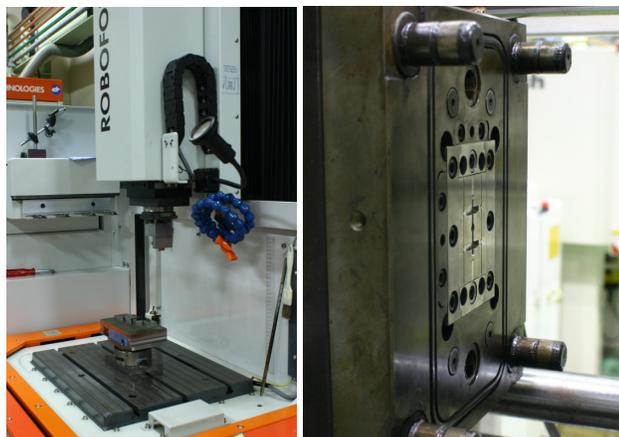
Micro EDM machine and the machined part of a steel mold with four cavities.
